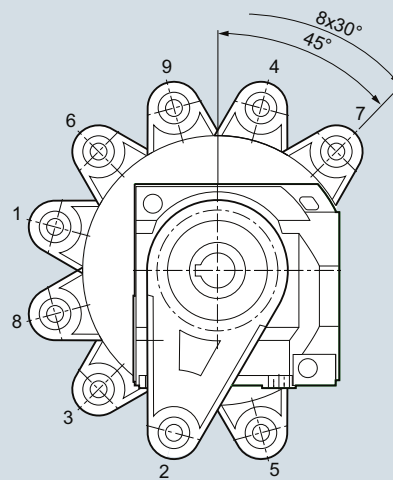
/9 Helical worm gearboxes C in shaft-mounted design
